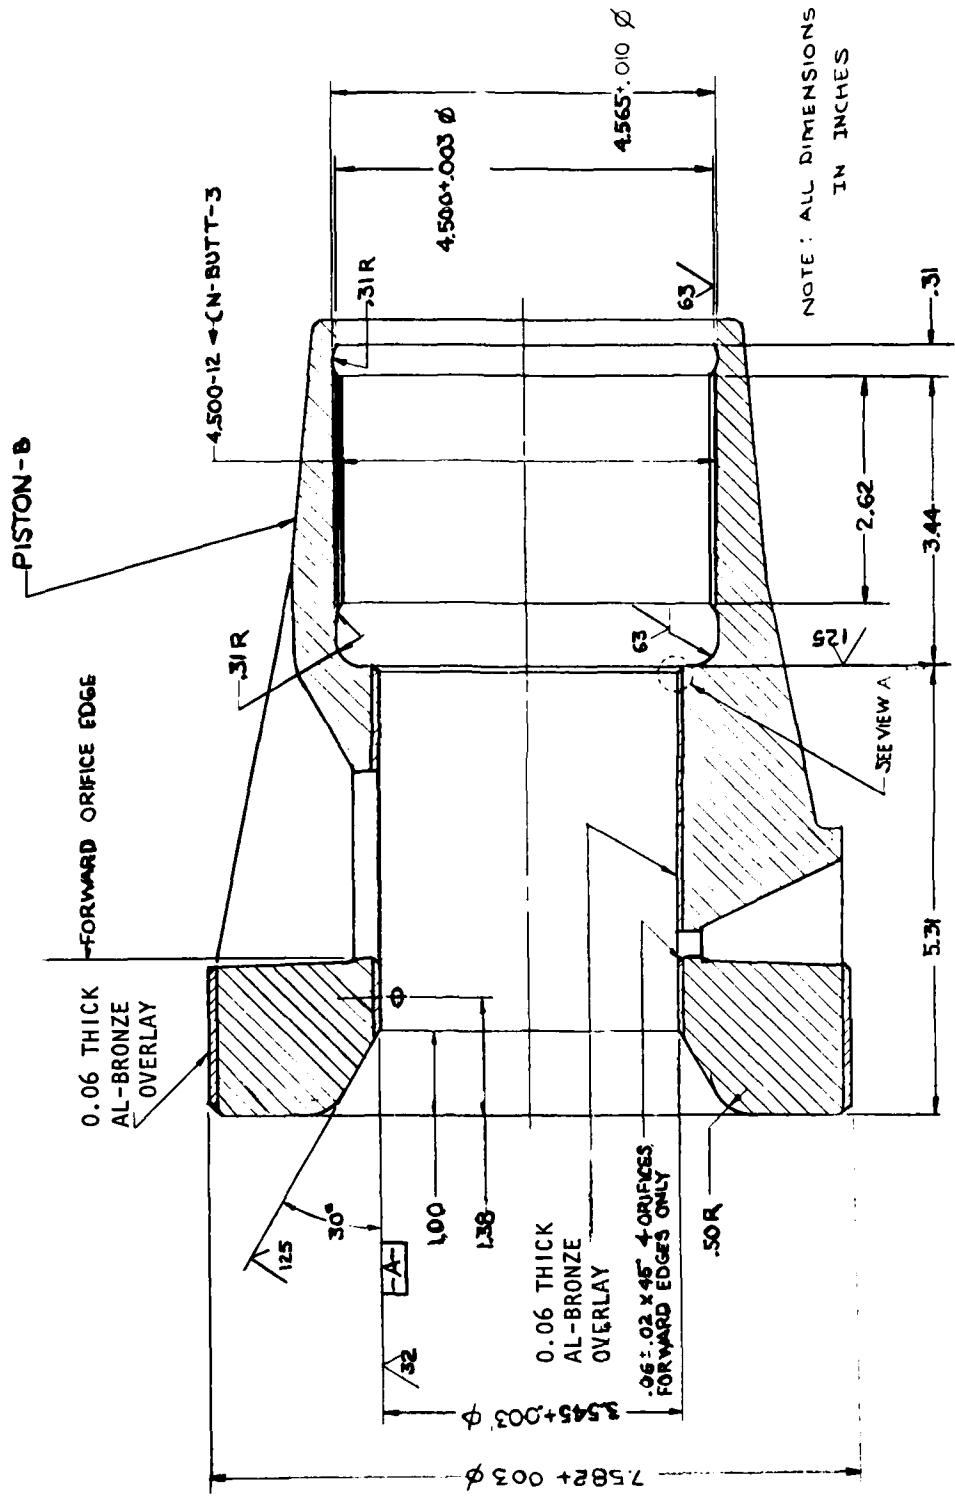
CROSS SECTIONAL VIEW OF RECOIL PISTON FOR M174 GUN MOUNT, COATED WITH BEARING MATERIAL.
